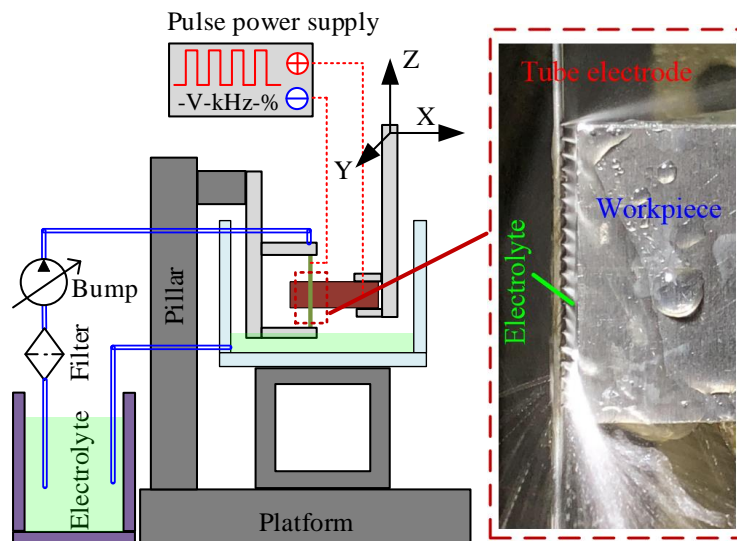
Schematic diagram of WECM using the fabricated tube electrode
